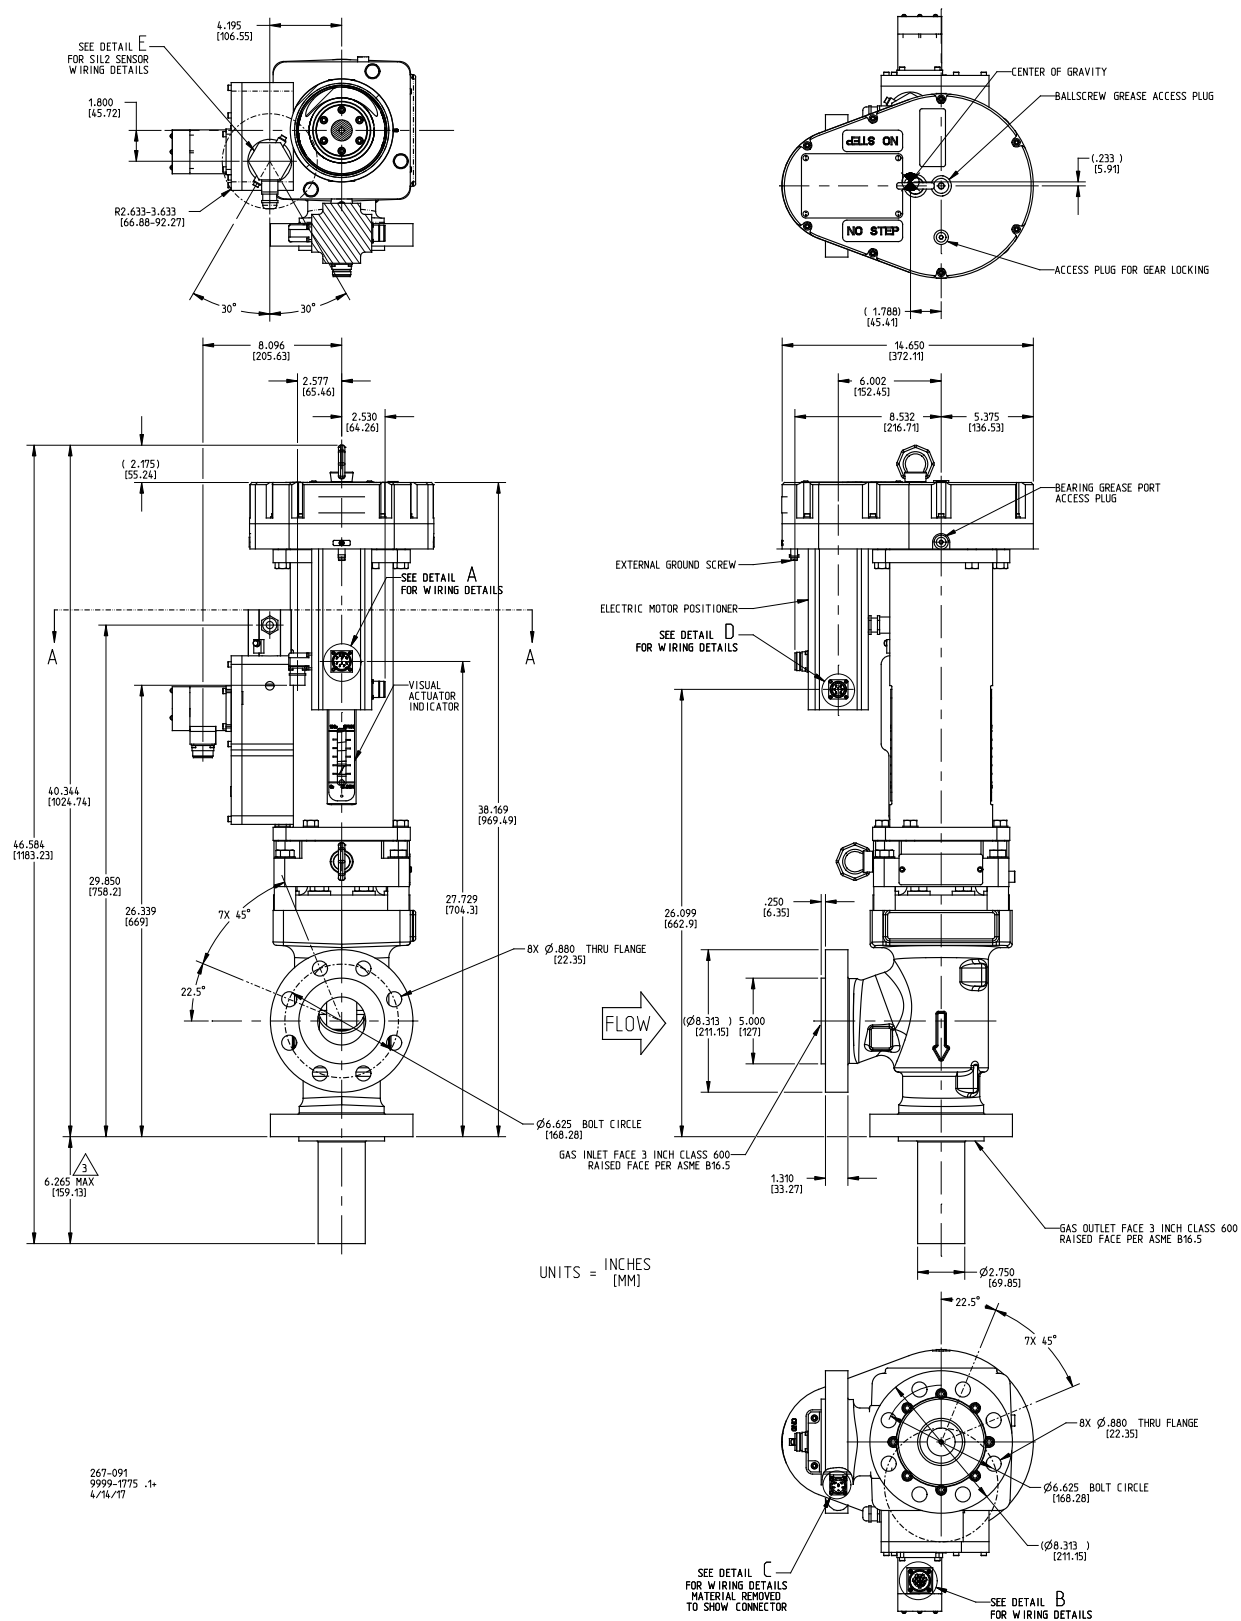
Outline Drawing (3-inch UHR LESV)
